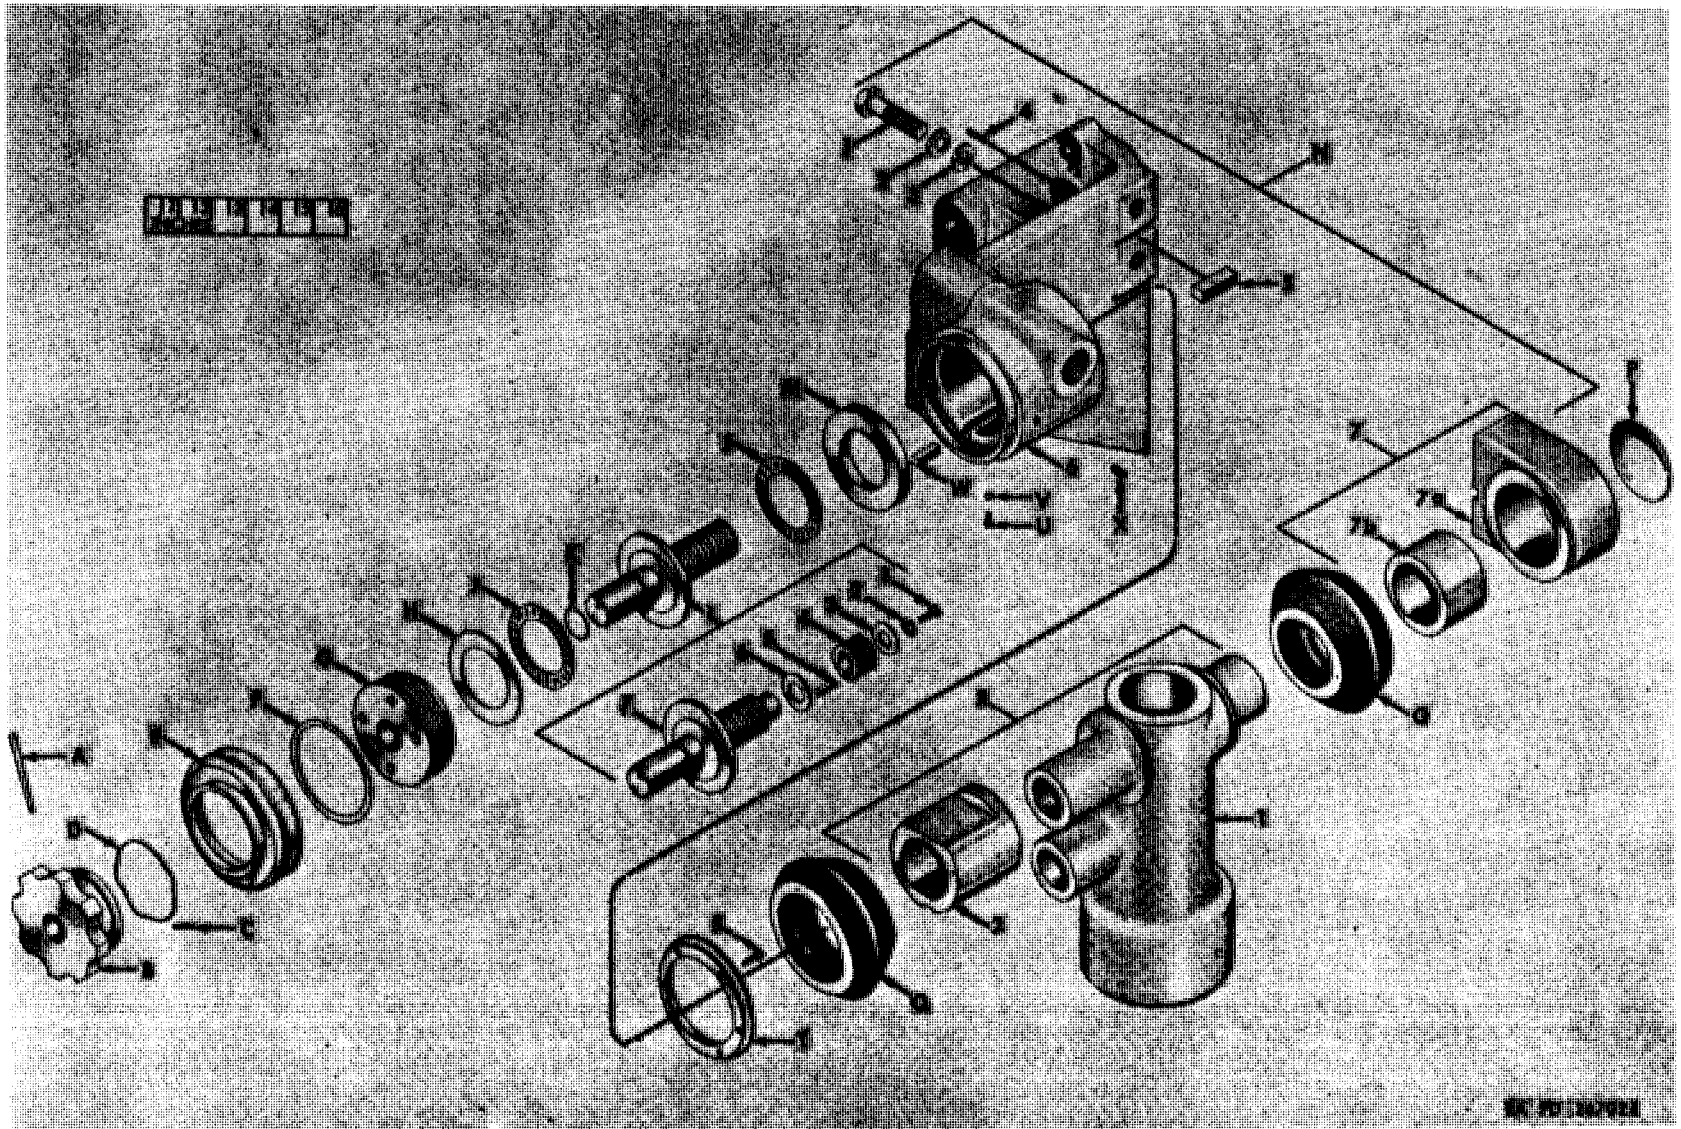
Deflection boresight adjusting mechanism and slide assembly—exploded view.
